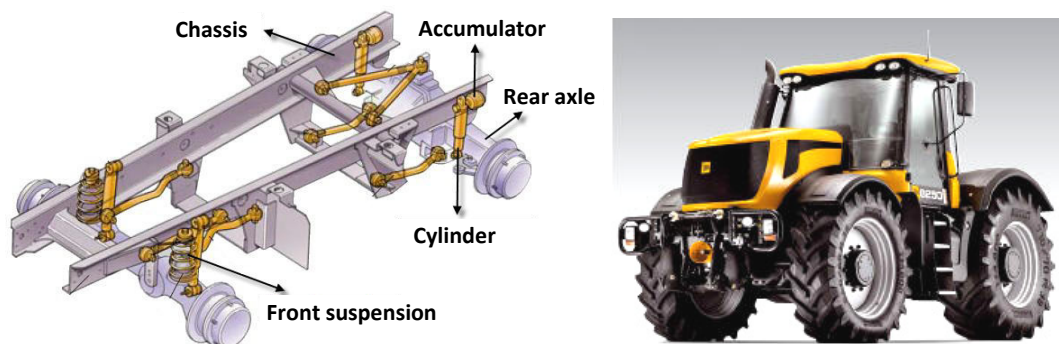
Full frame construction of fully suspension “JCB-FASTRAC” tractor (FASTRAC, 2007).
